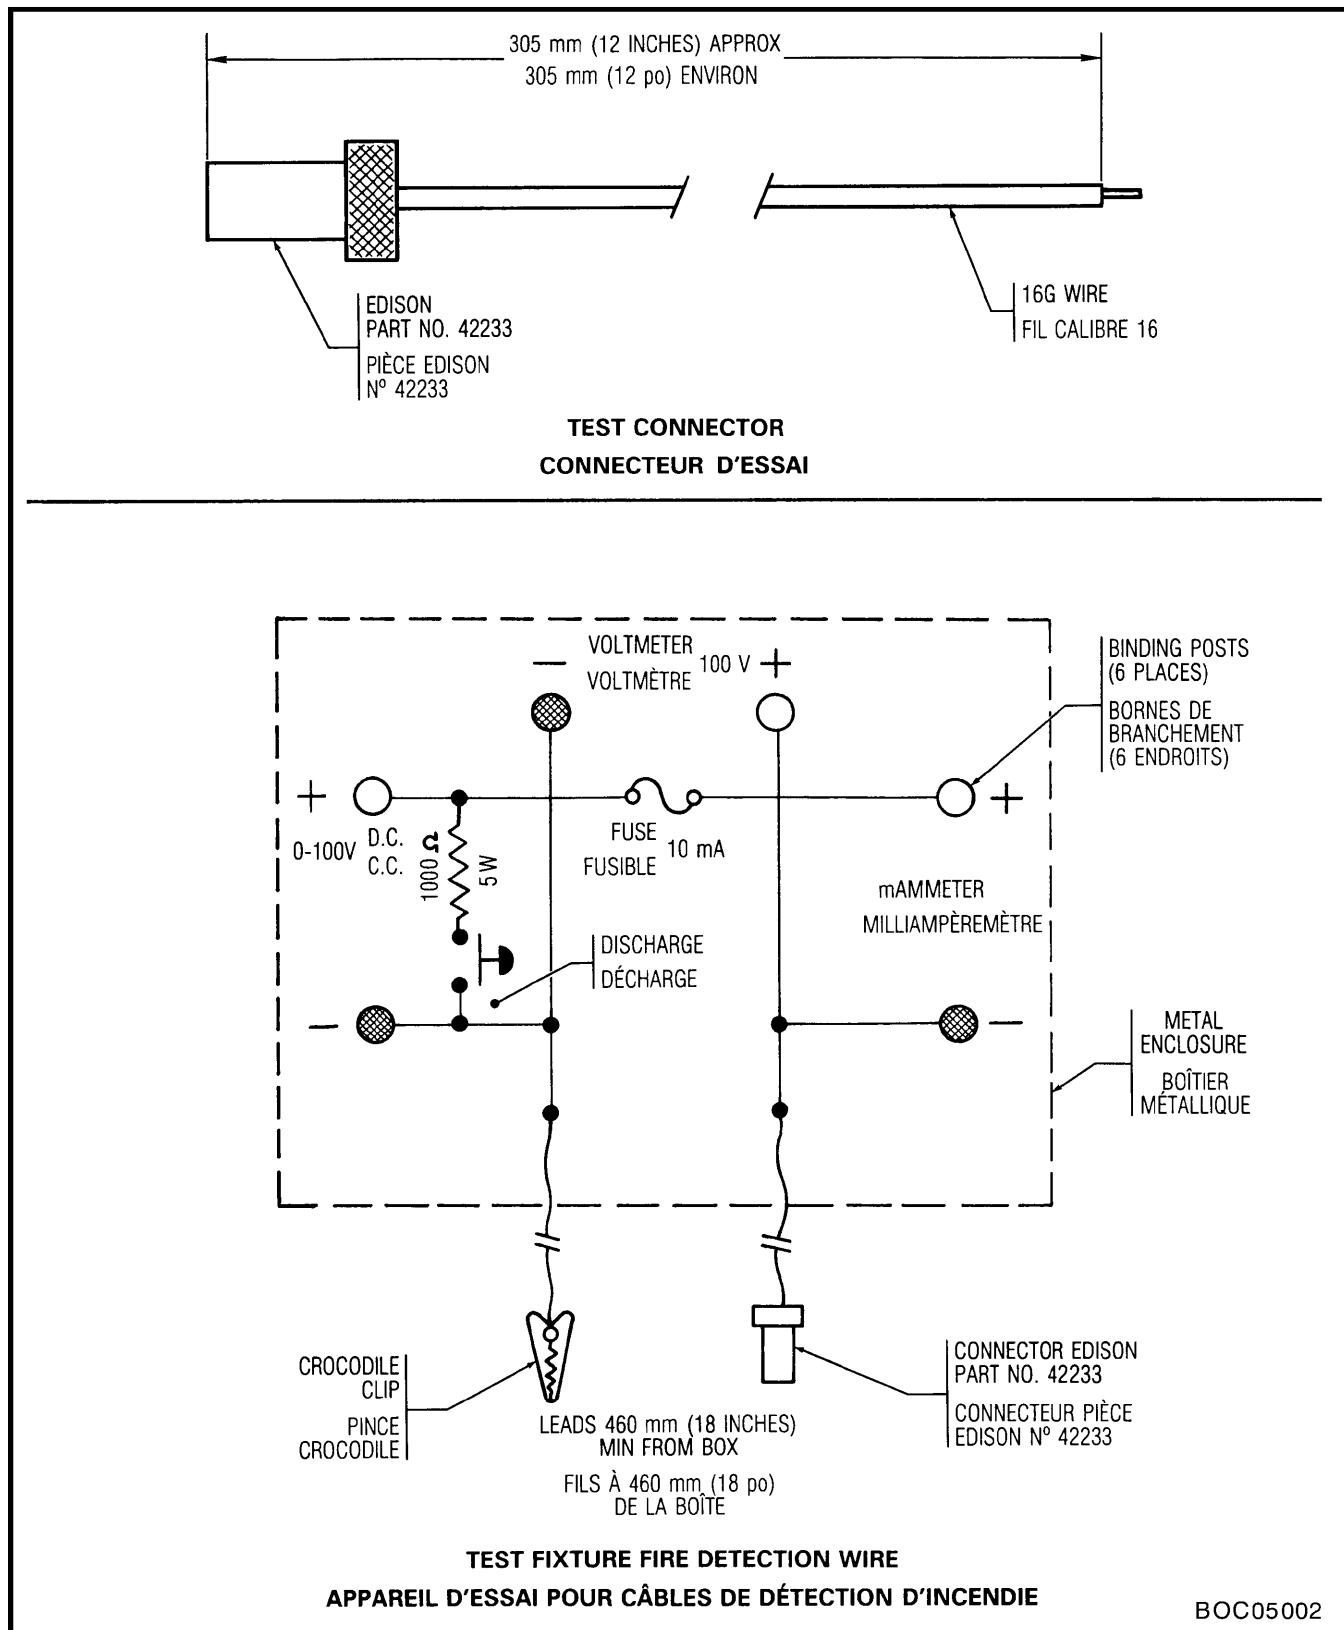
Fire and Overheat Detection Cable Test Fixture and Test Connector
